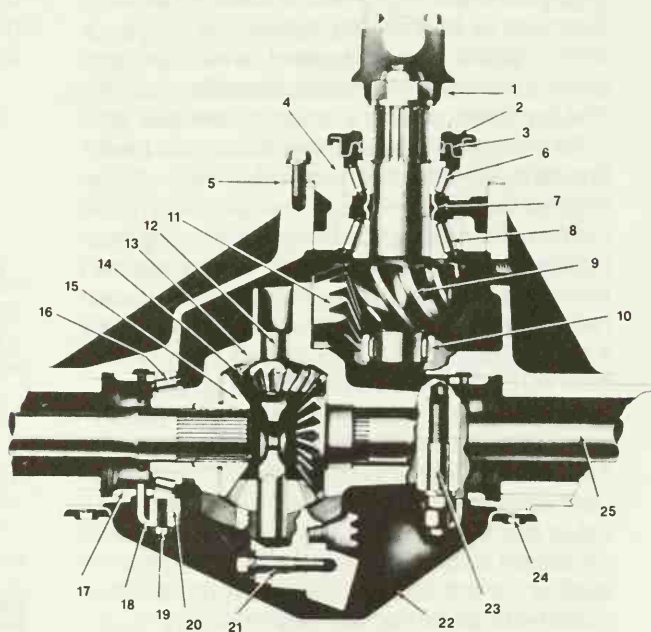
A cross-sectional view of a differential with a straddle-mounted pinion. (GMC Truck and Coach Division of General Motors Corporation)
